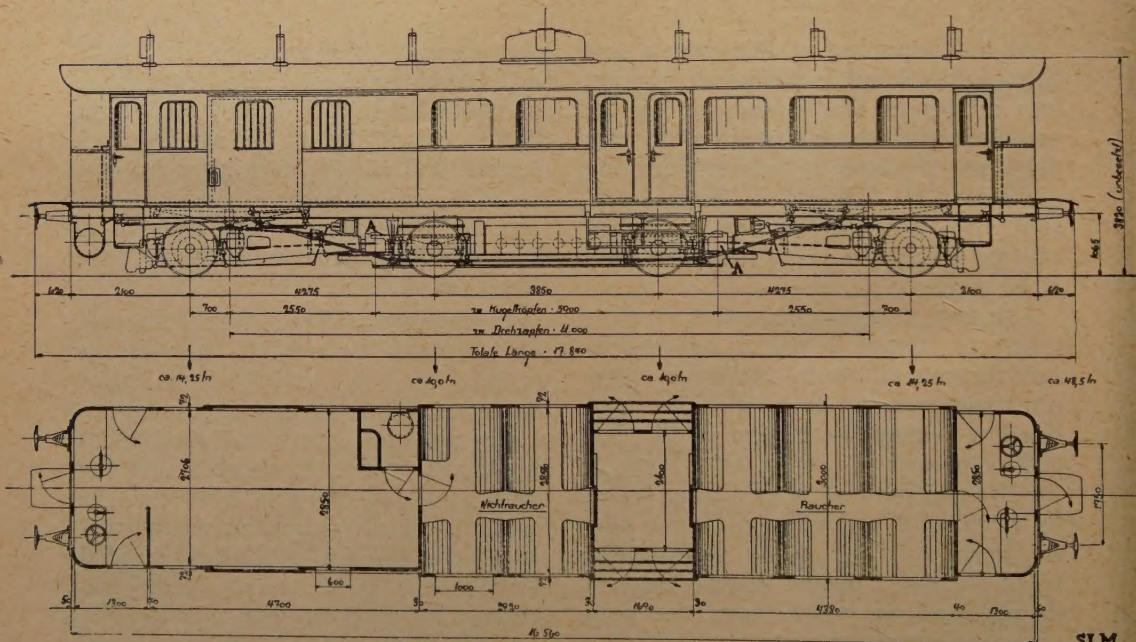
The rail motor coach of figure 1, No. 9921, in elevation and plan, showing the wheel arrangement, the spring gear, driving mechanism, and brake gear, as well as the interior arrangement of the body.
